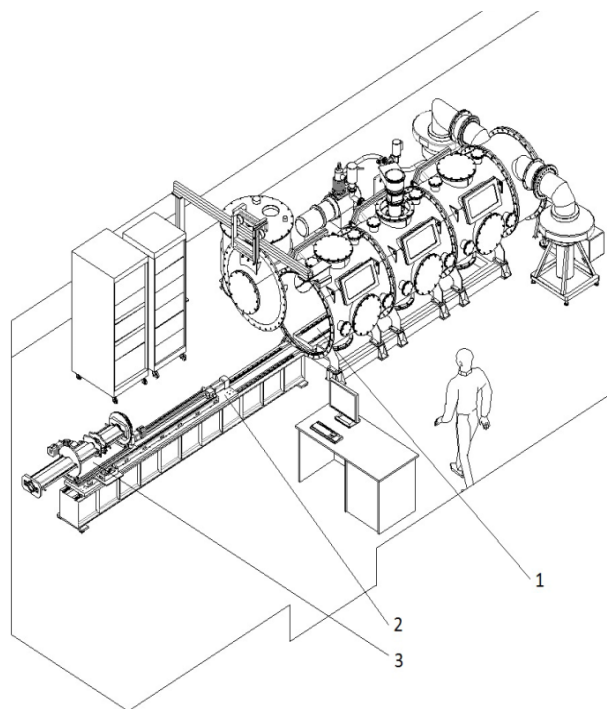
Scheme of the electron-beam welding installation. 1 – lower (fixed) platform; 2 - upper (movable) platform; 3 - mechanism to rotate the piece to weld about its longitudinal axis and linear modules.
